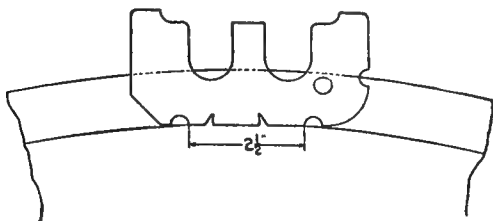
METHOD OF GAGING SHELLED AND FLAT SPOTS.
